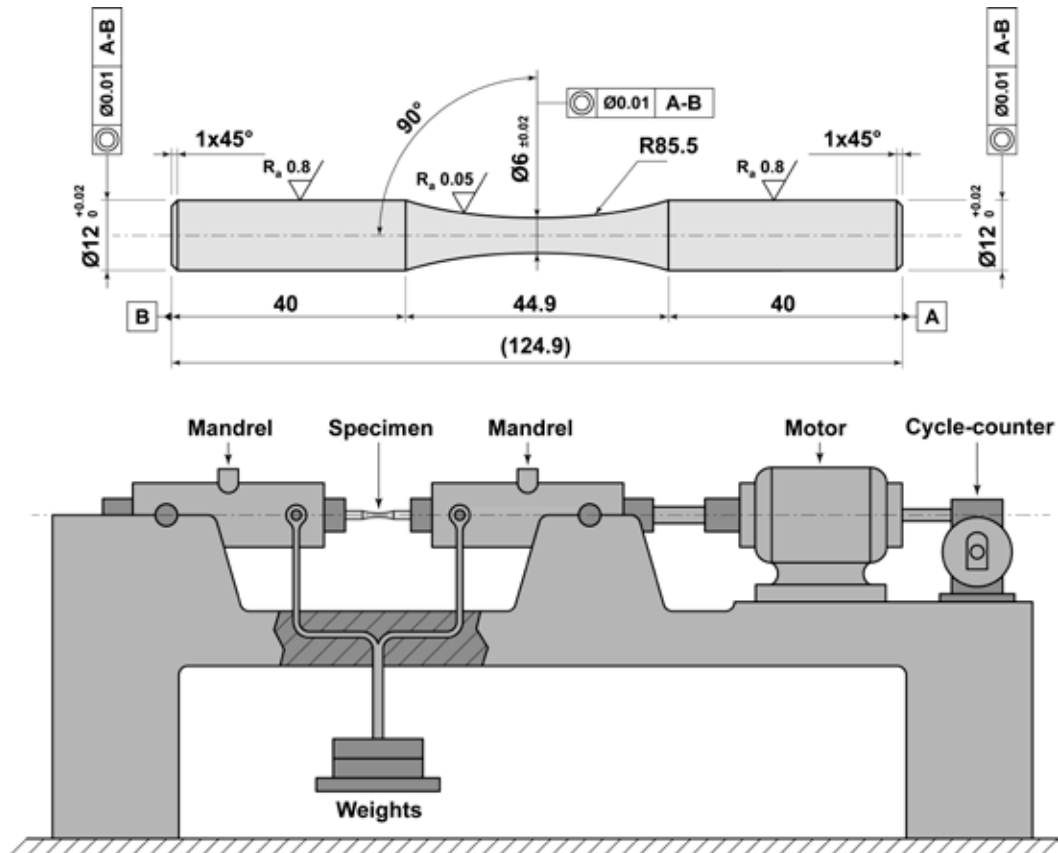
Construction drawing of an hourglass specimen for fatigue testing in rotating bending conditions and schematic of the testing machine used.
